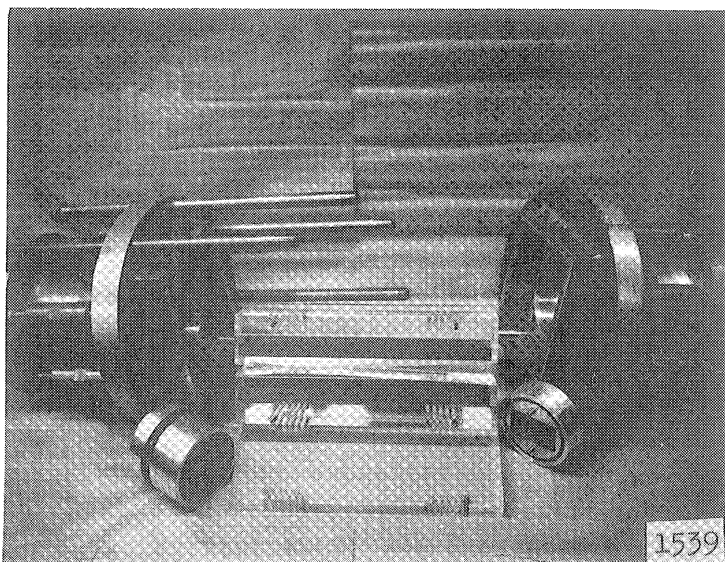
Assembly of Venturi Showing Axial Bars Partially Inserted and Showing Spacer Discs for Both Ends.
